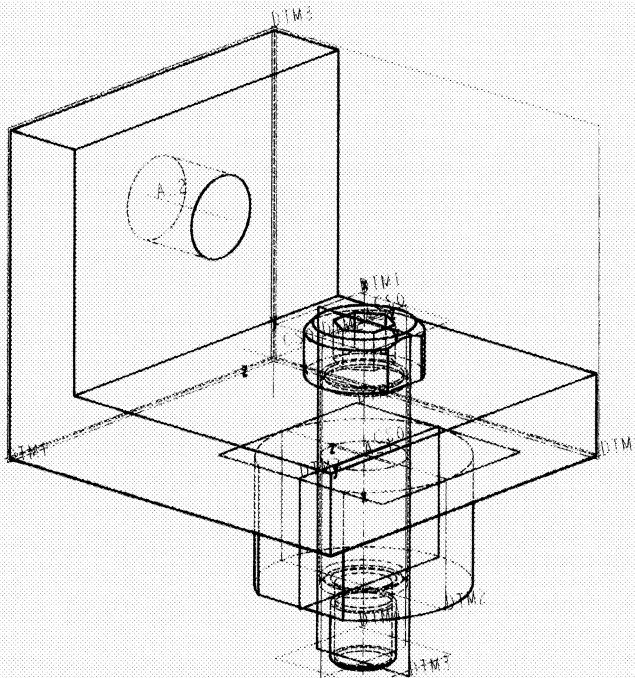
FIGURE N Angle, Socket-Head Shoulder Screw, and Sleeve Assembly
